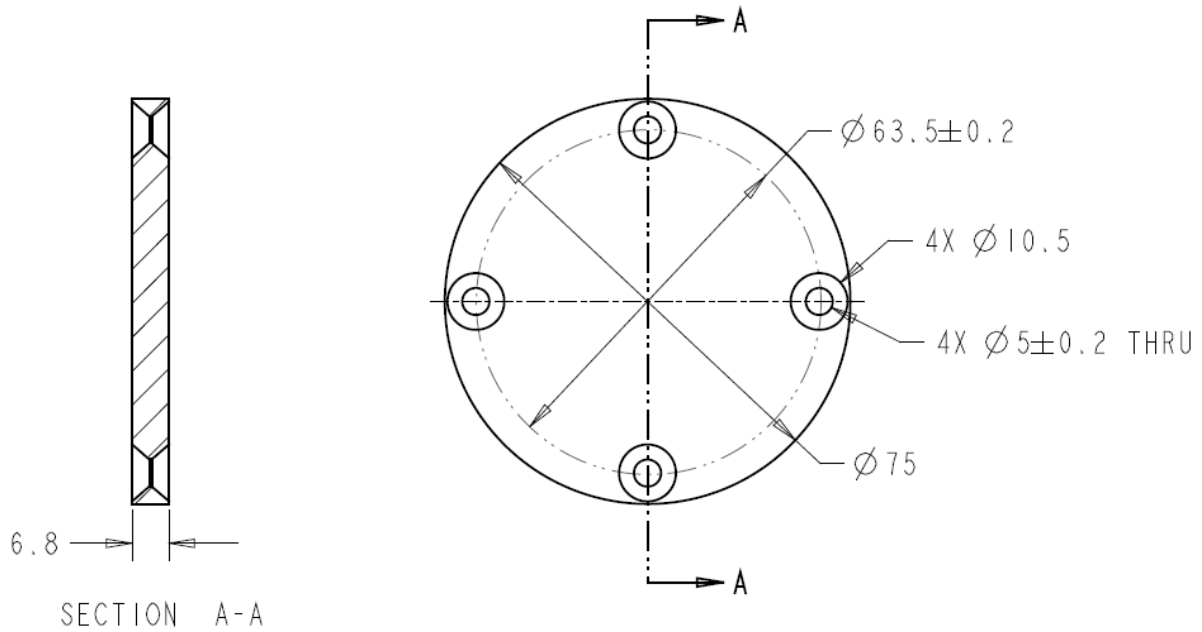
Cast iron and A390-T6 disk dimensions in millimeters (A390-T6 disk thickness is 12.7 mm)
